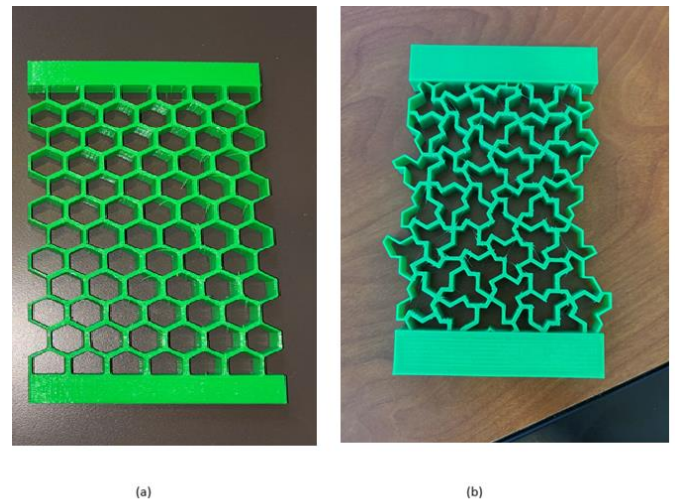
(a) The specimen of conventional hexagonal honeycomb structure printed-out by 3D printer, made of PLA (b) The specimen of aperiodic structure printed-out by 3D printer, made of PLA.
